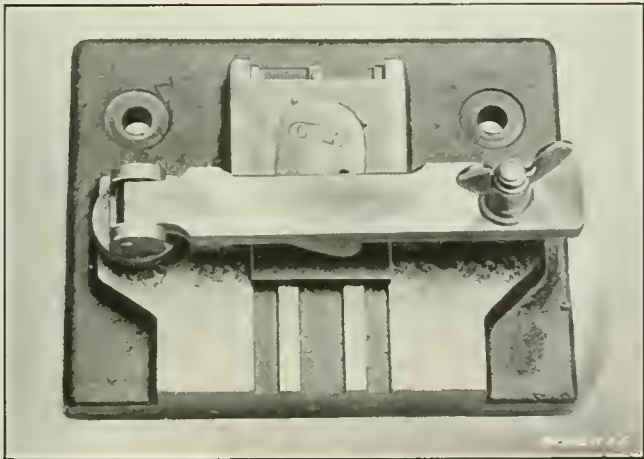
Jig for Holding Pearl Handle for Engraving the Name
